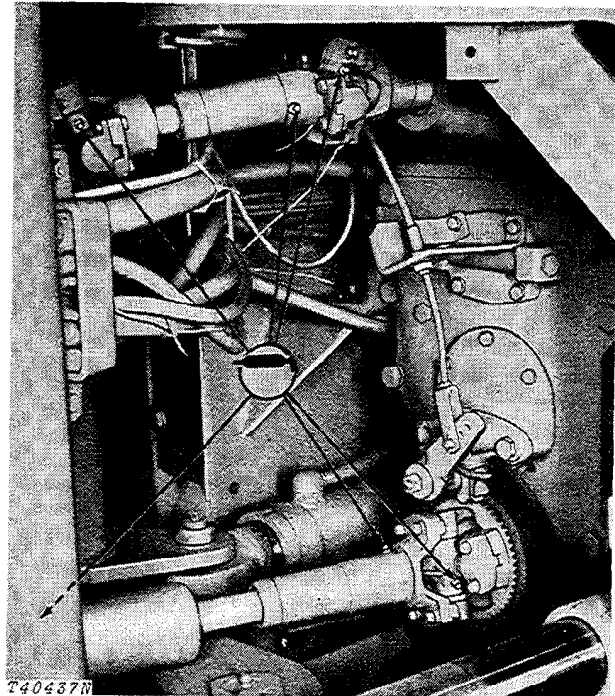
Winch Drive Line and Lower Telescoping Universal Joints (6 Points)
